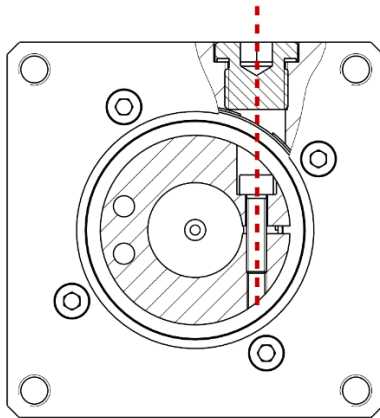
Clamping coupling PA, PE, PF, PBA, PBE, PBF gearboxes
